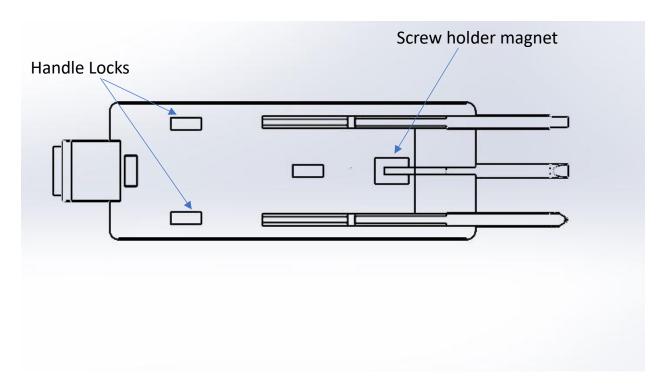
SECTIONAL VIEW OF THE DESIGN
